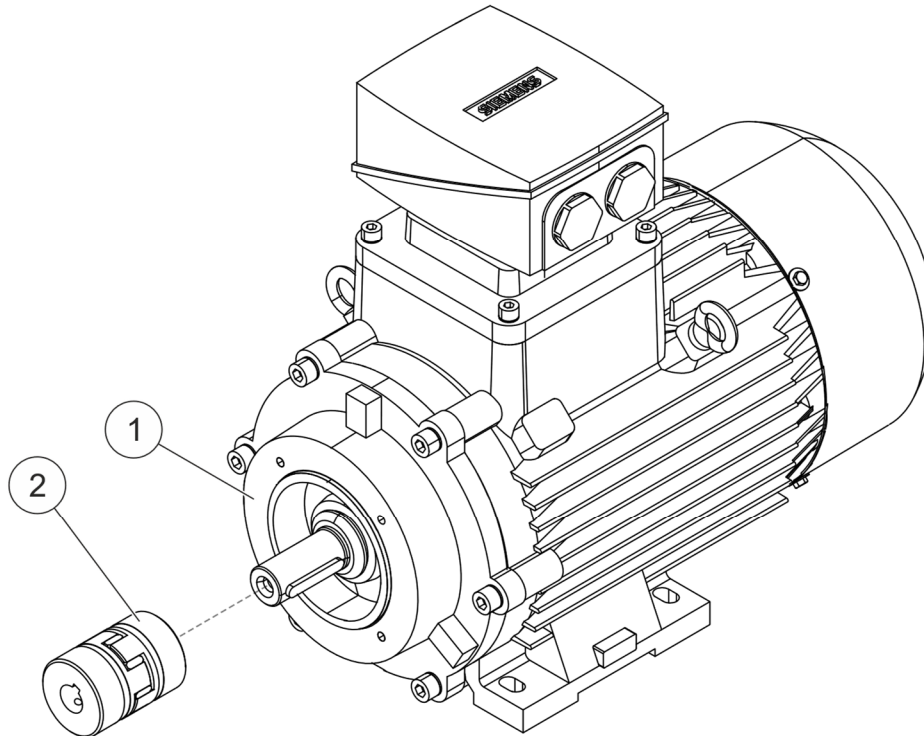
Drive unit assembly PQ25J-BG100-6P-EX / PQ25J-BG112-8P-EX
